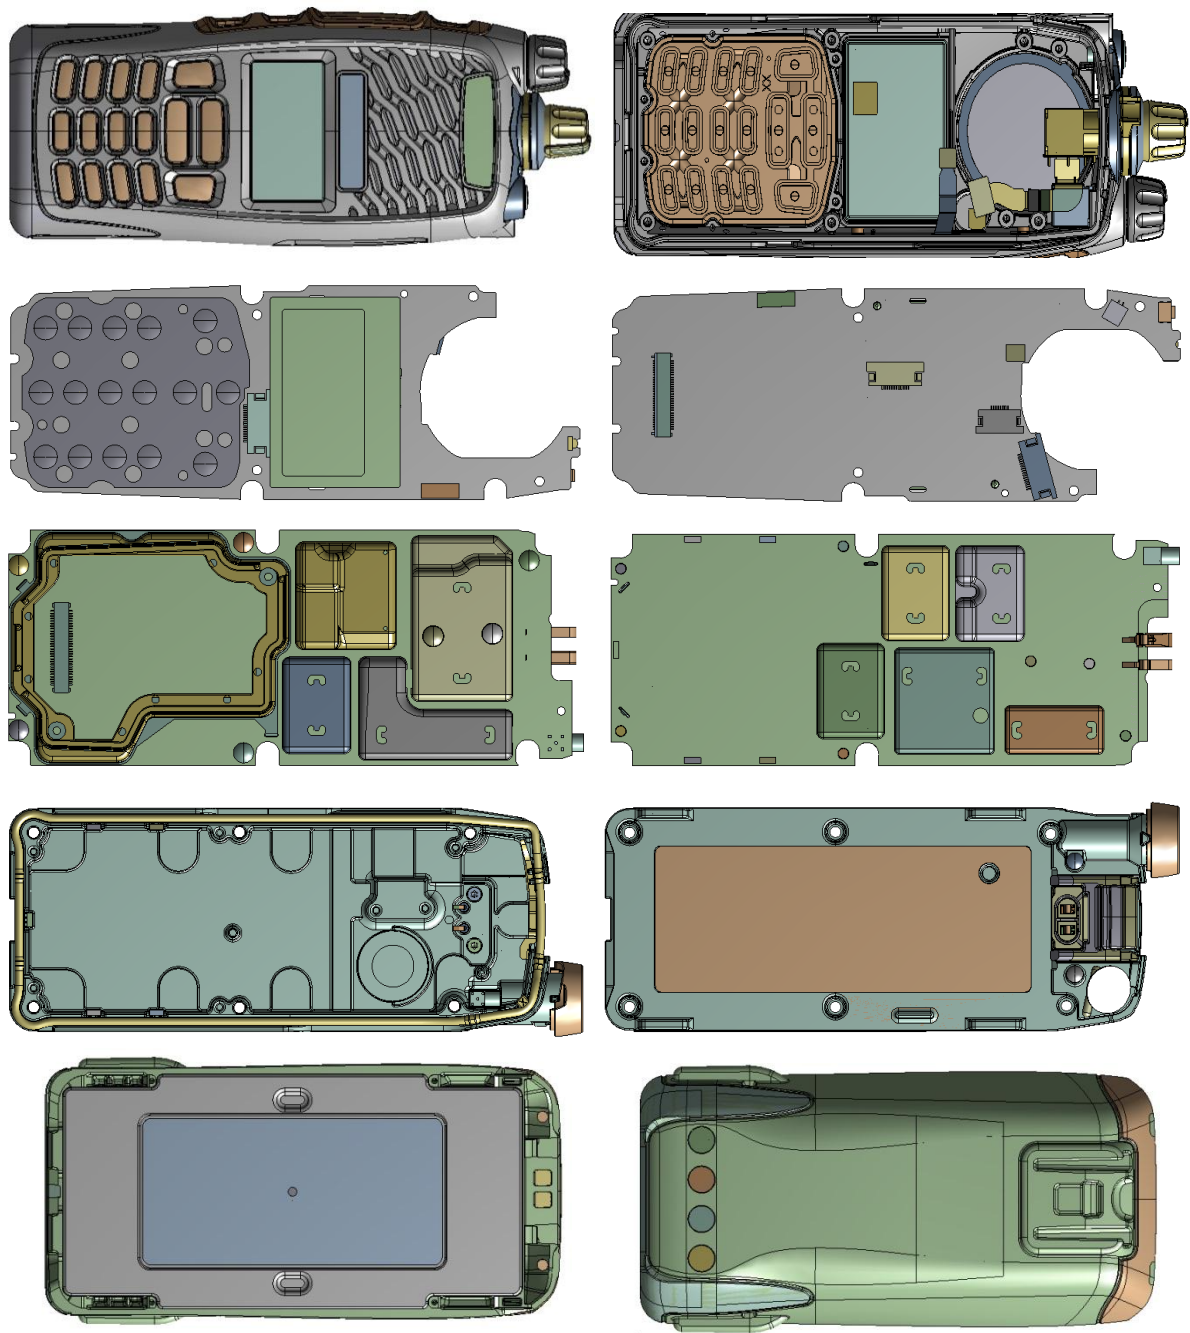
Subassemblies of Tait handheld radio, from top to bottom, front panel, MMI board, RF board, chassis, battery
